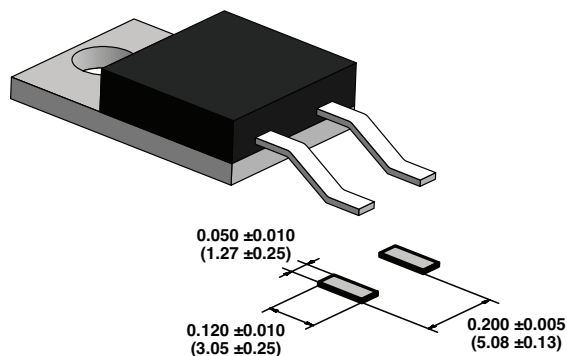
VPR221S Land Pattern Dimensions in inches (millimeters)
